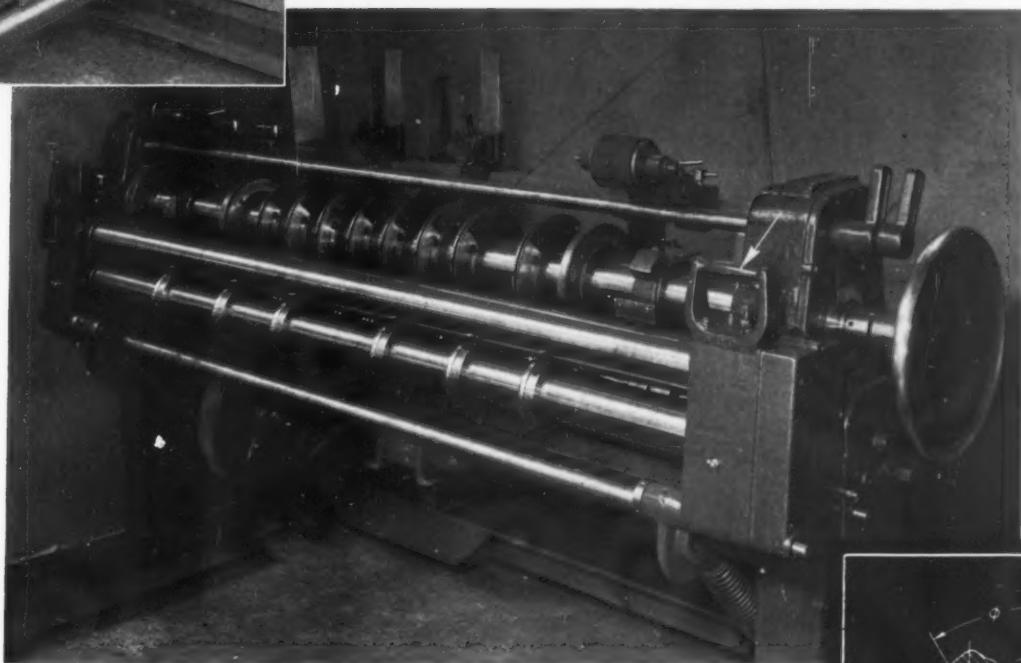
Left—Corrugated box partition slotting machine with creaser shafts lowered.
